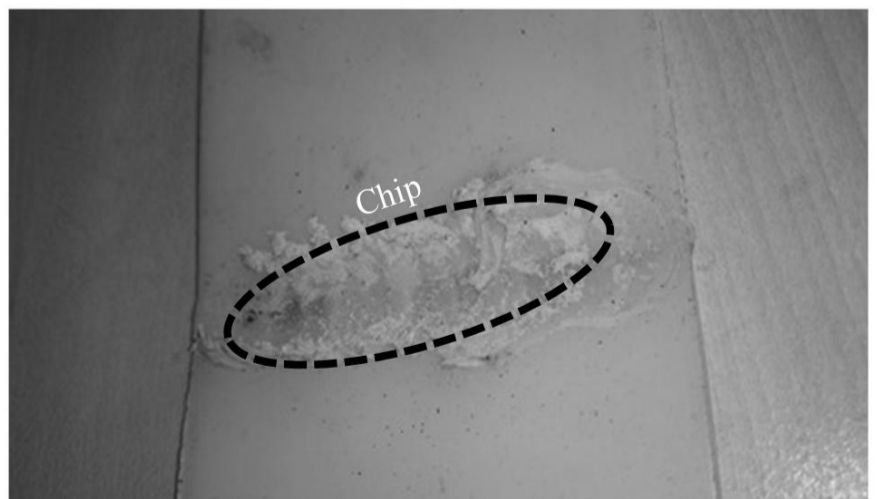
Image welding line at speeds travel to 80 mm (Test No. 12)
